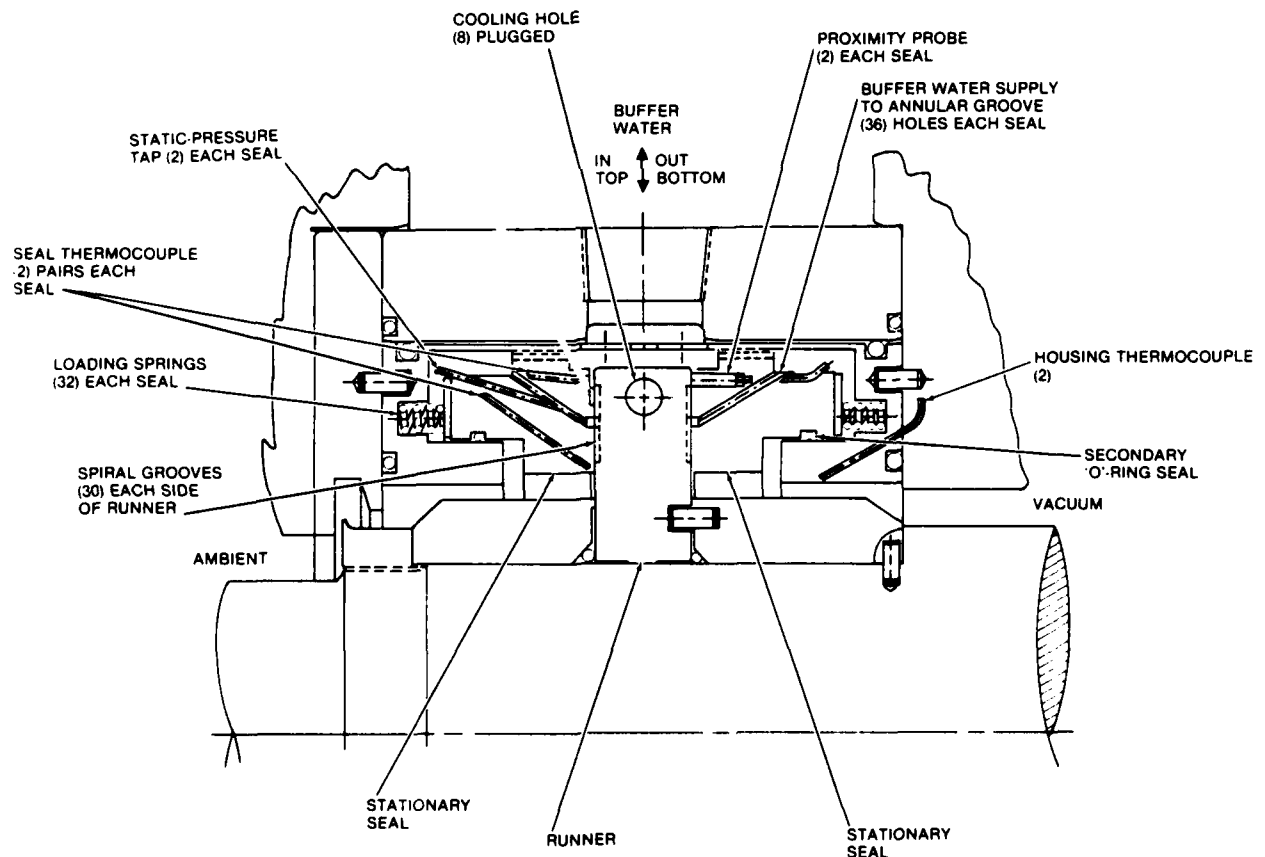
NASA-Solar Crane Design Spiral Groove Face Seal Assembly
